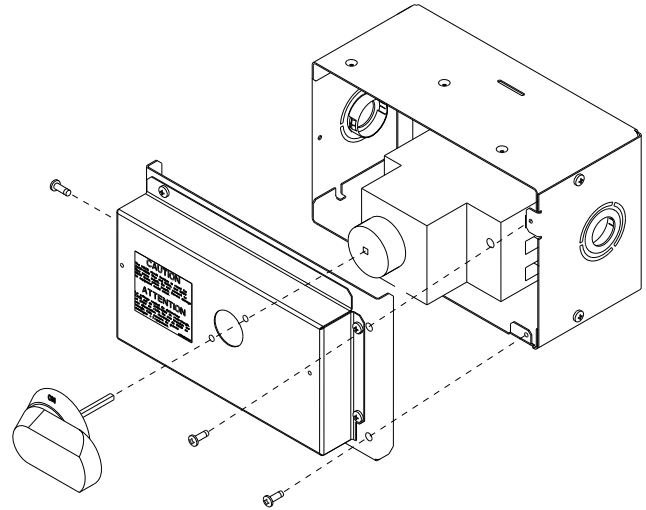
Handle and Shaft Assembly for HACR Circuit Breaker
